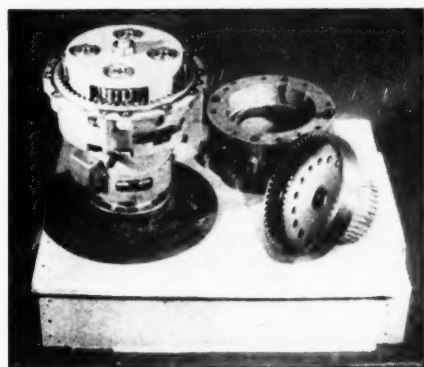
The "works" inside a propeller-pitch beam rotator. The ring gear mentioned in the text is shown at the right, in front of the upper gear housing. The gear carrier, which is to be drilled and tapped, is still fastened to the top of the assembly. After modification, rotation speeds up to 5 r.p.m. may be obtained with these motors.
